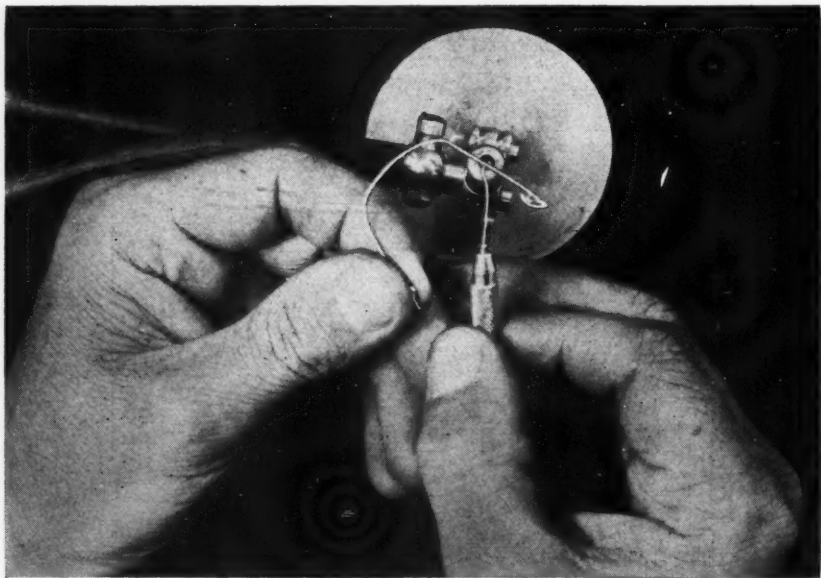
Soldering Deepep wire .020 inch to body wire for a recurve spring.
